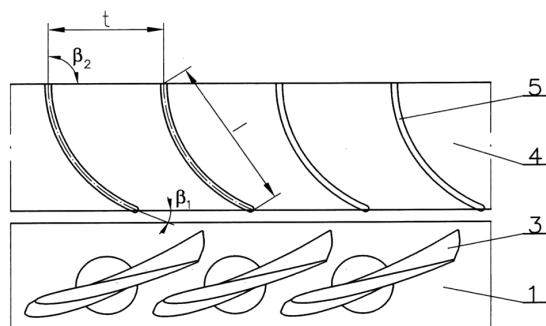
Developed view of blade cascades of fan rotor and guide blades
